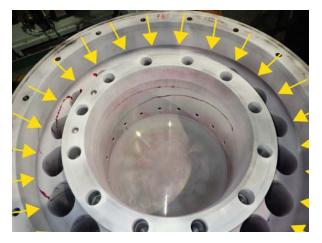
Dye check revealing cracks in piston crown (yellow arrows indicate the crack line)
